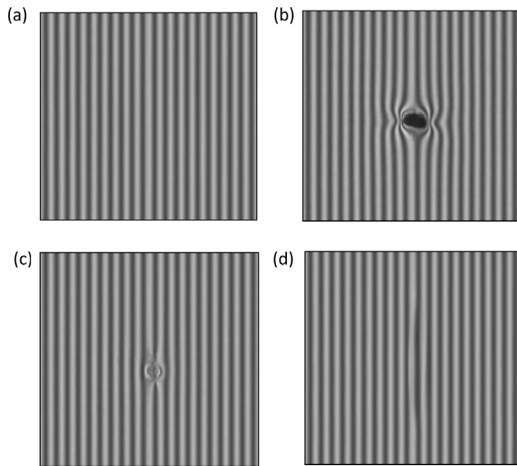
The fringe images of typical defects: (a) defect-free; (b) stone; (c) knot; (d) ream.
